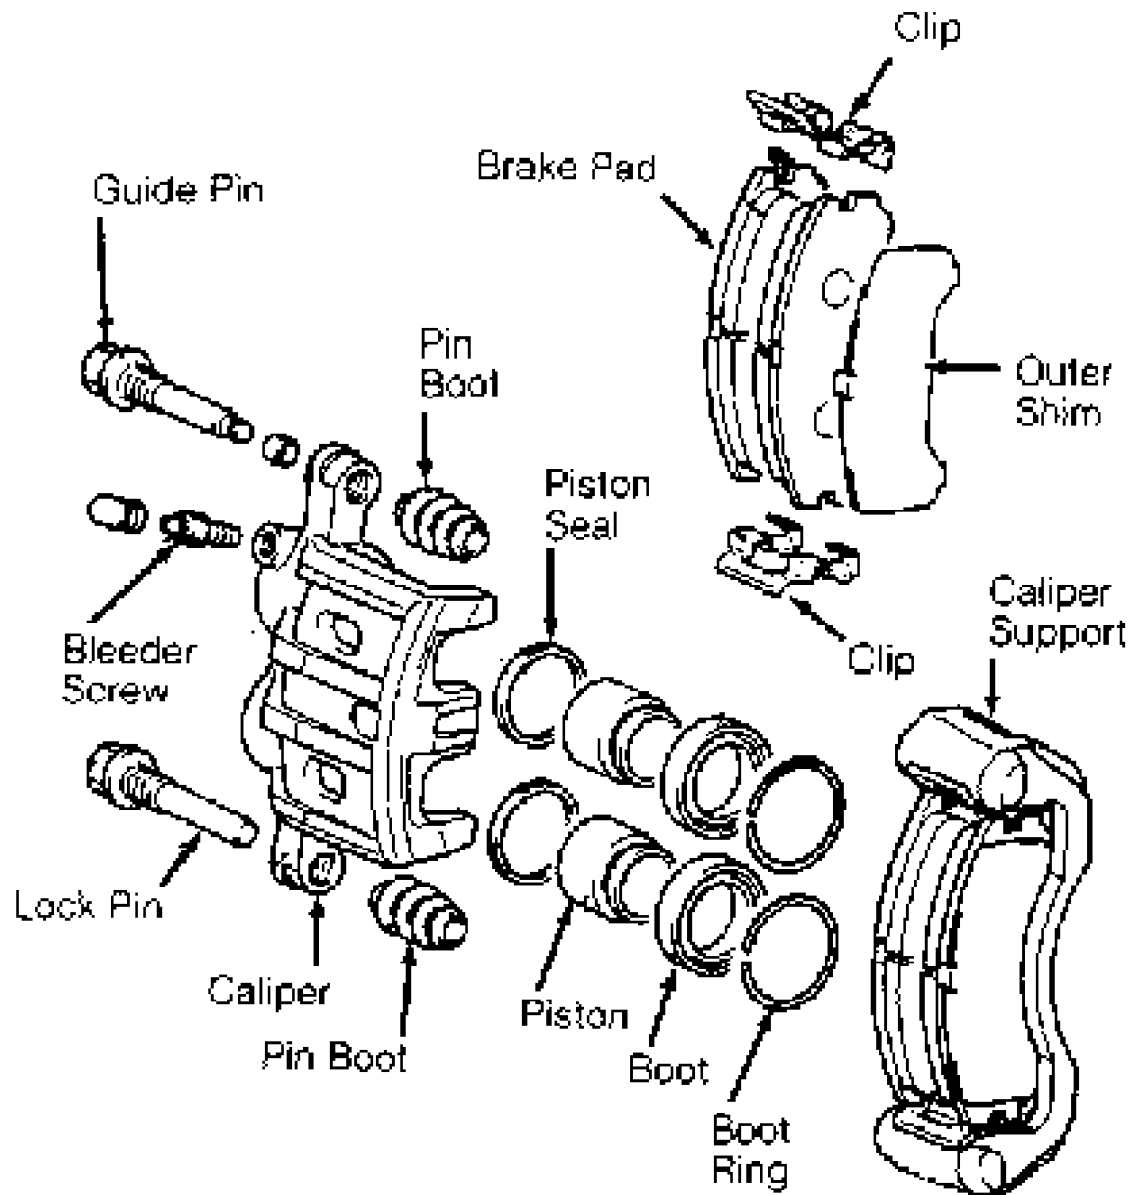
View Of Front Disc Brake Caliper (Typical Dual Piston)
